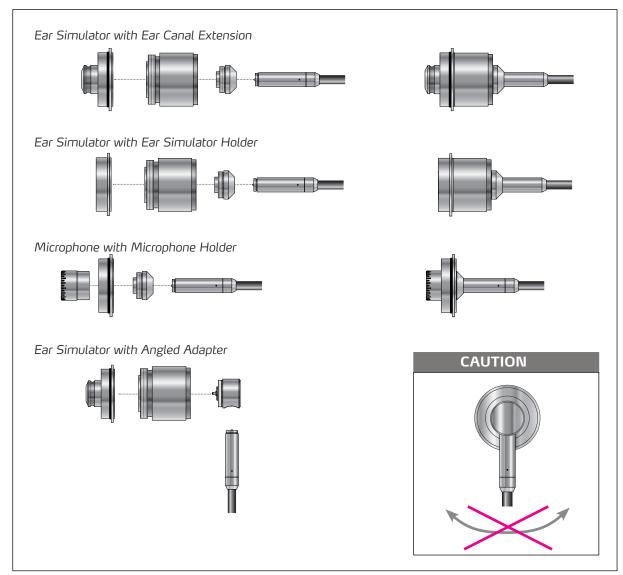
Assembly before mounting: Angled adapters must be used with the ear simulator for binaural configurations.
